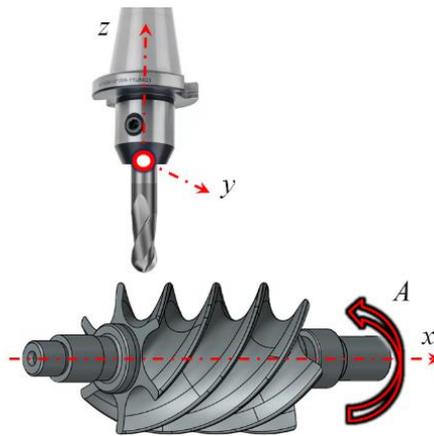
The cycloid screw milling mechanism on a five-axis milling machine
